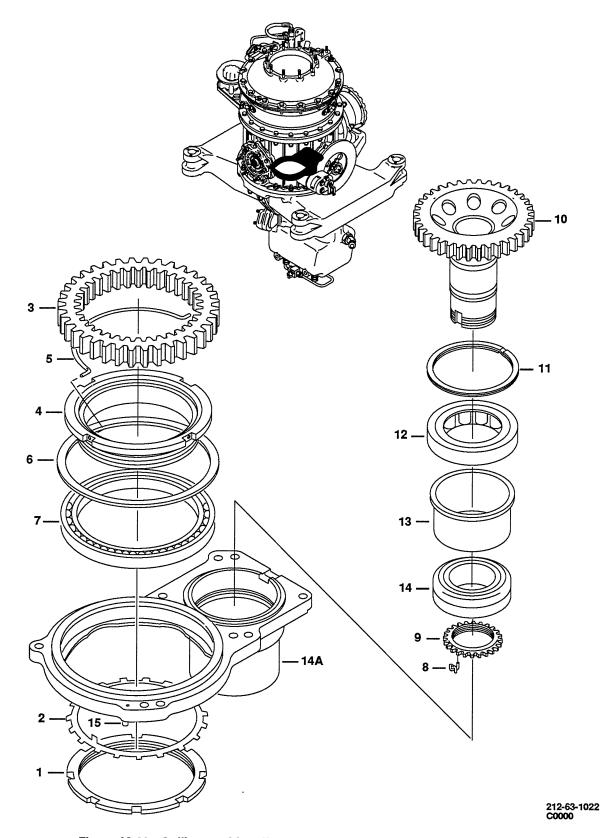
Quill assembly, offset accessory and tail rotor drive
